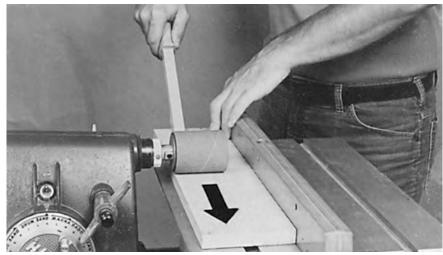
One way to surface sand wide stock. After making the first pass, turn the stock end-for-end and make a second pass.
